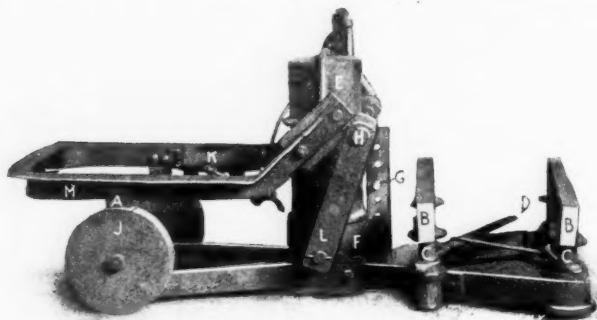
Farwell Portable Pneumatic Roll-over Molding Machine
